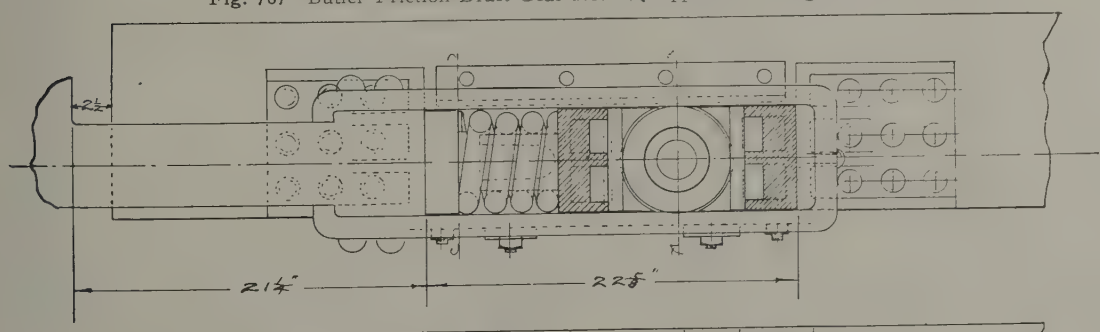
Butler Friction Draft Gear No. 370 Applied to Freight Car.
